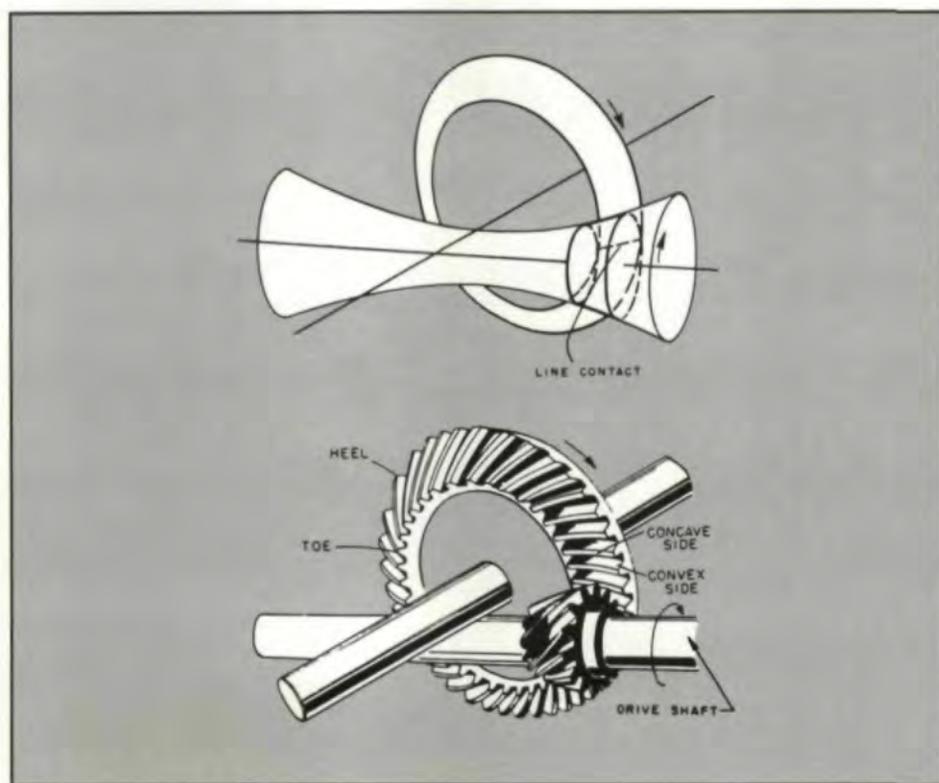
Bevel-gear arrangements. (Courtesy General Motors Corporation.)
